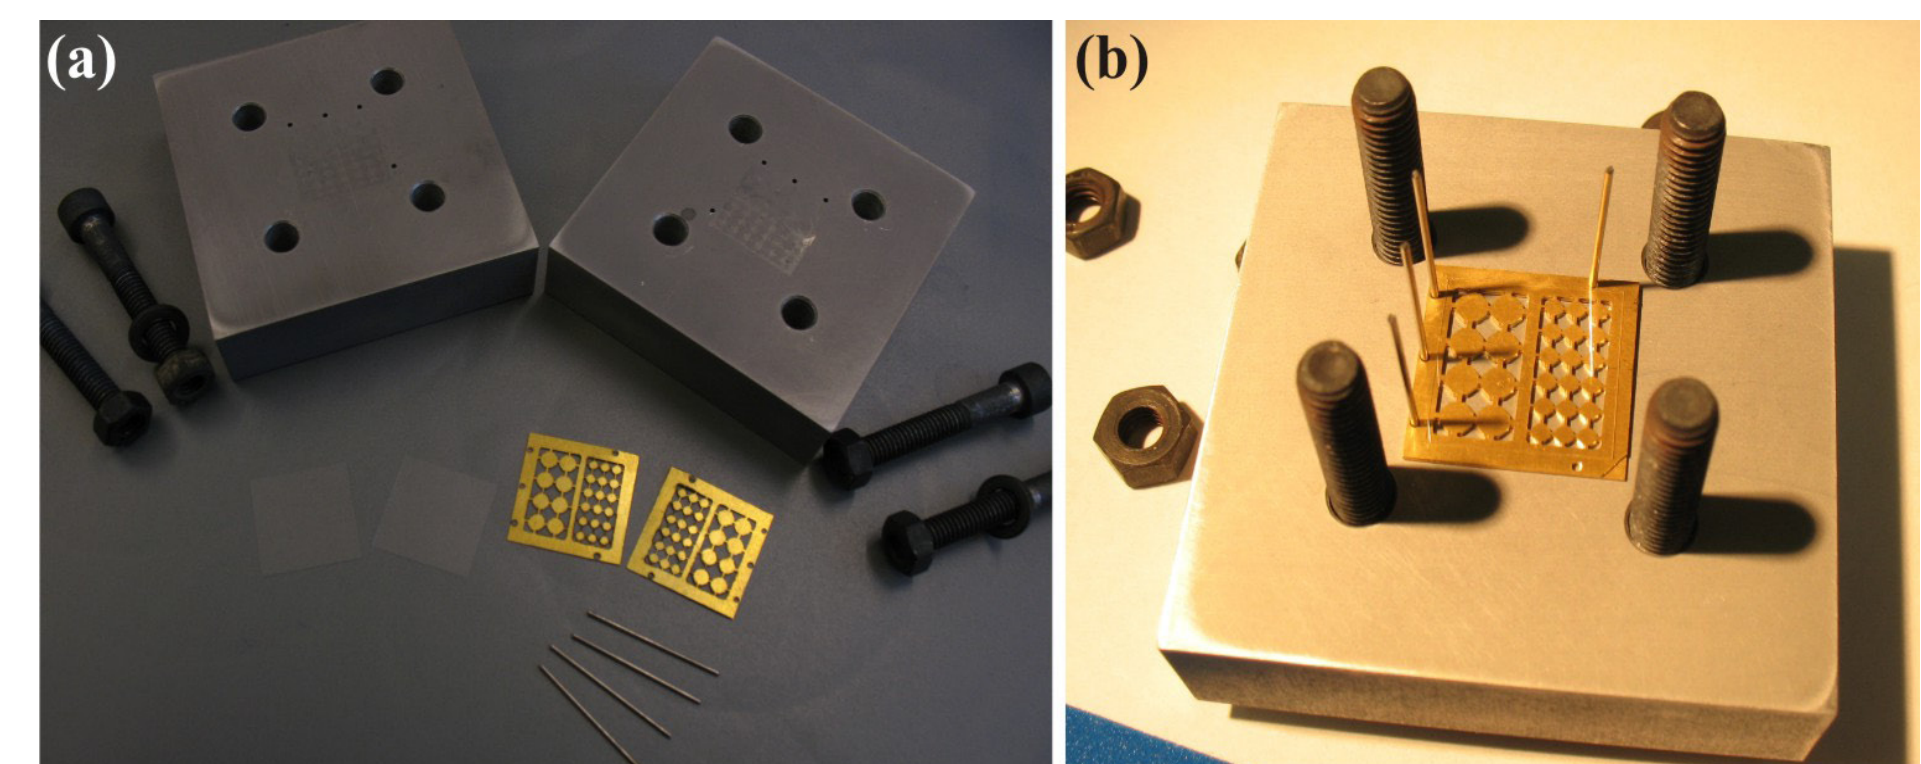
(a) Design of the press used for diffusion welding consisting of two halves of aluminum, four screws and four guidance pins. (b) The lower part of the press with a glass-absorber-source-absorber-glass sandwich.
